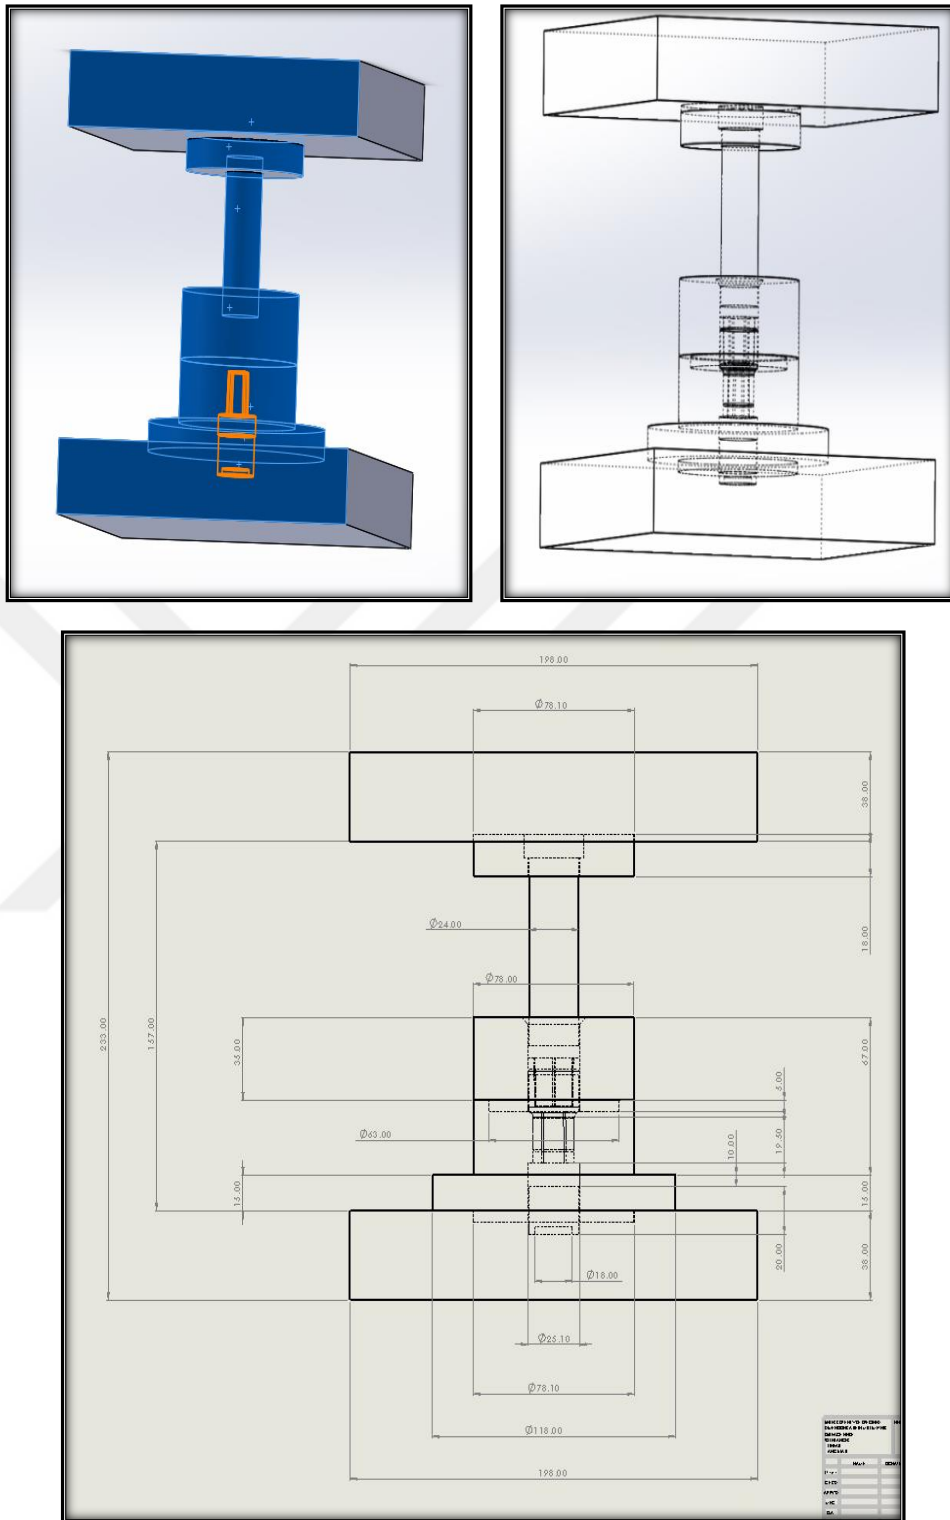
Shape of the die assembly of combined backward-forward extrusion
